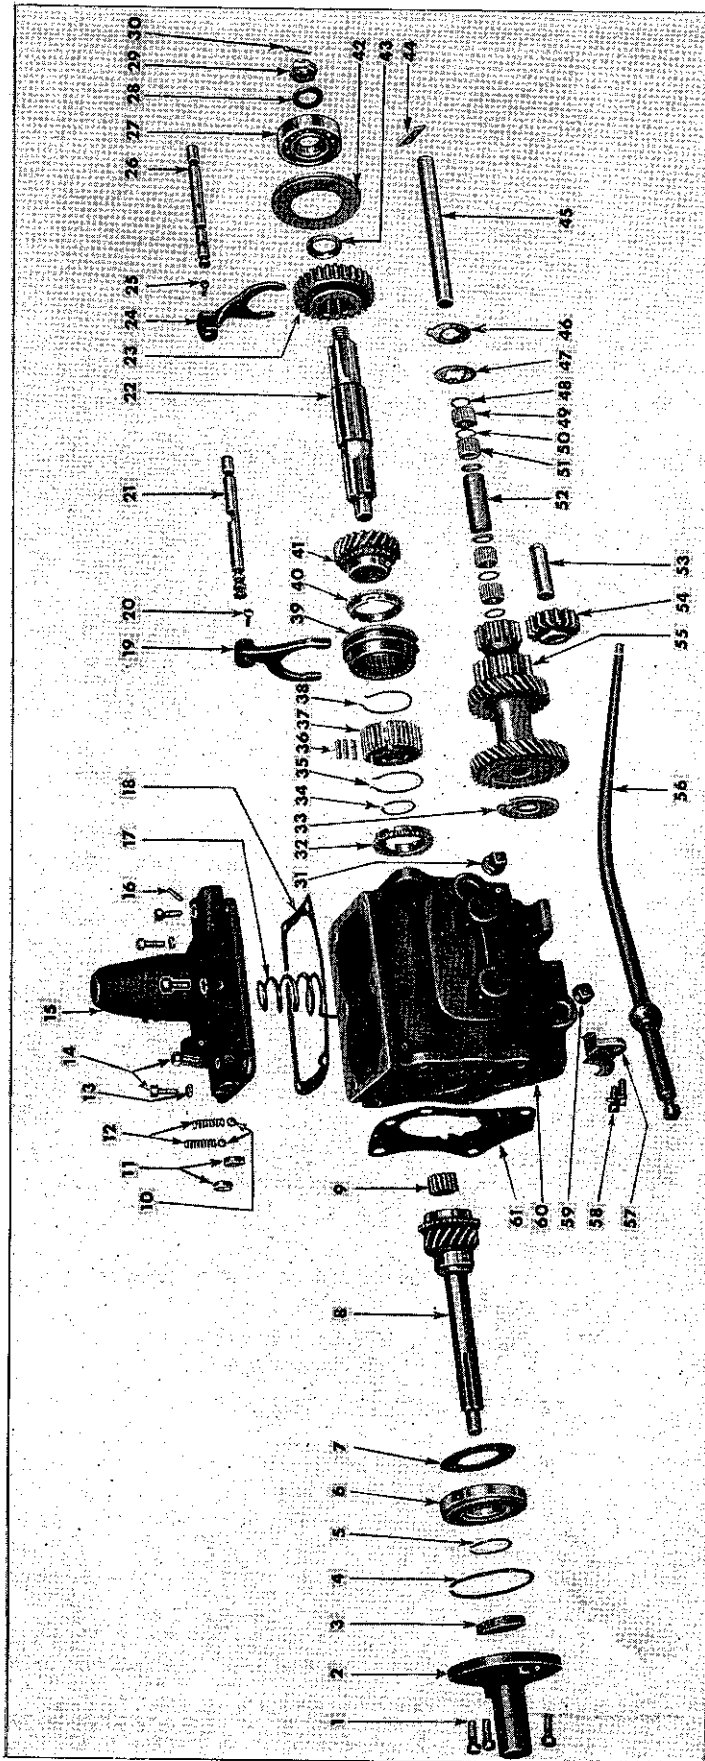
TRANSMISSION—4 WHEEL DRIVE MODELS
